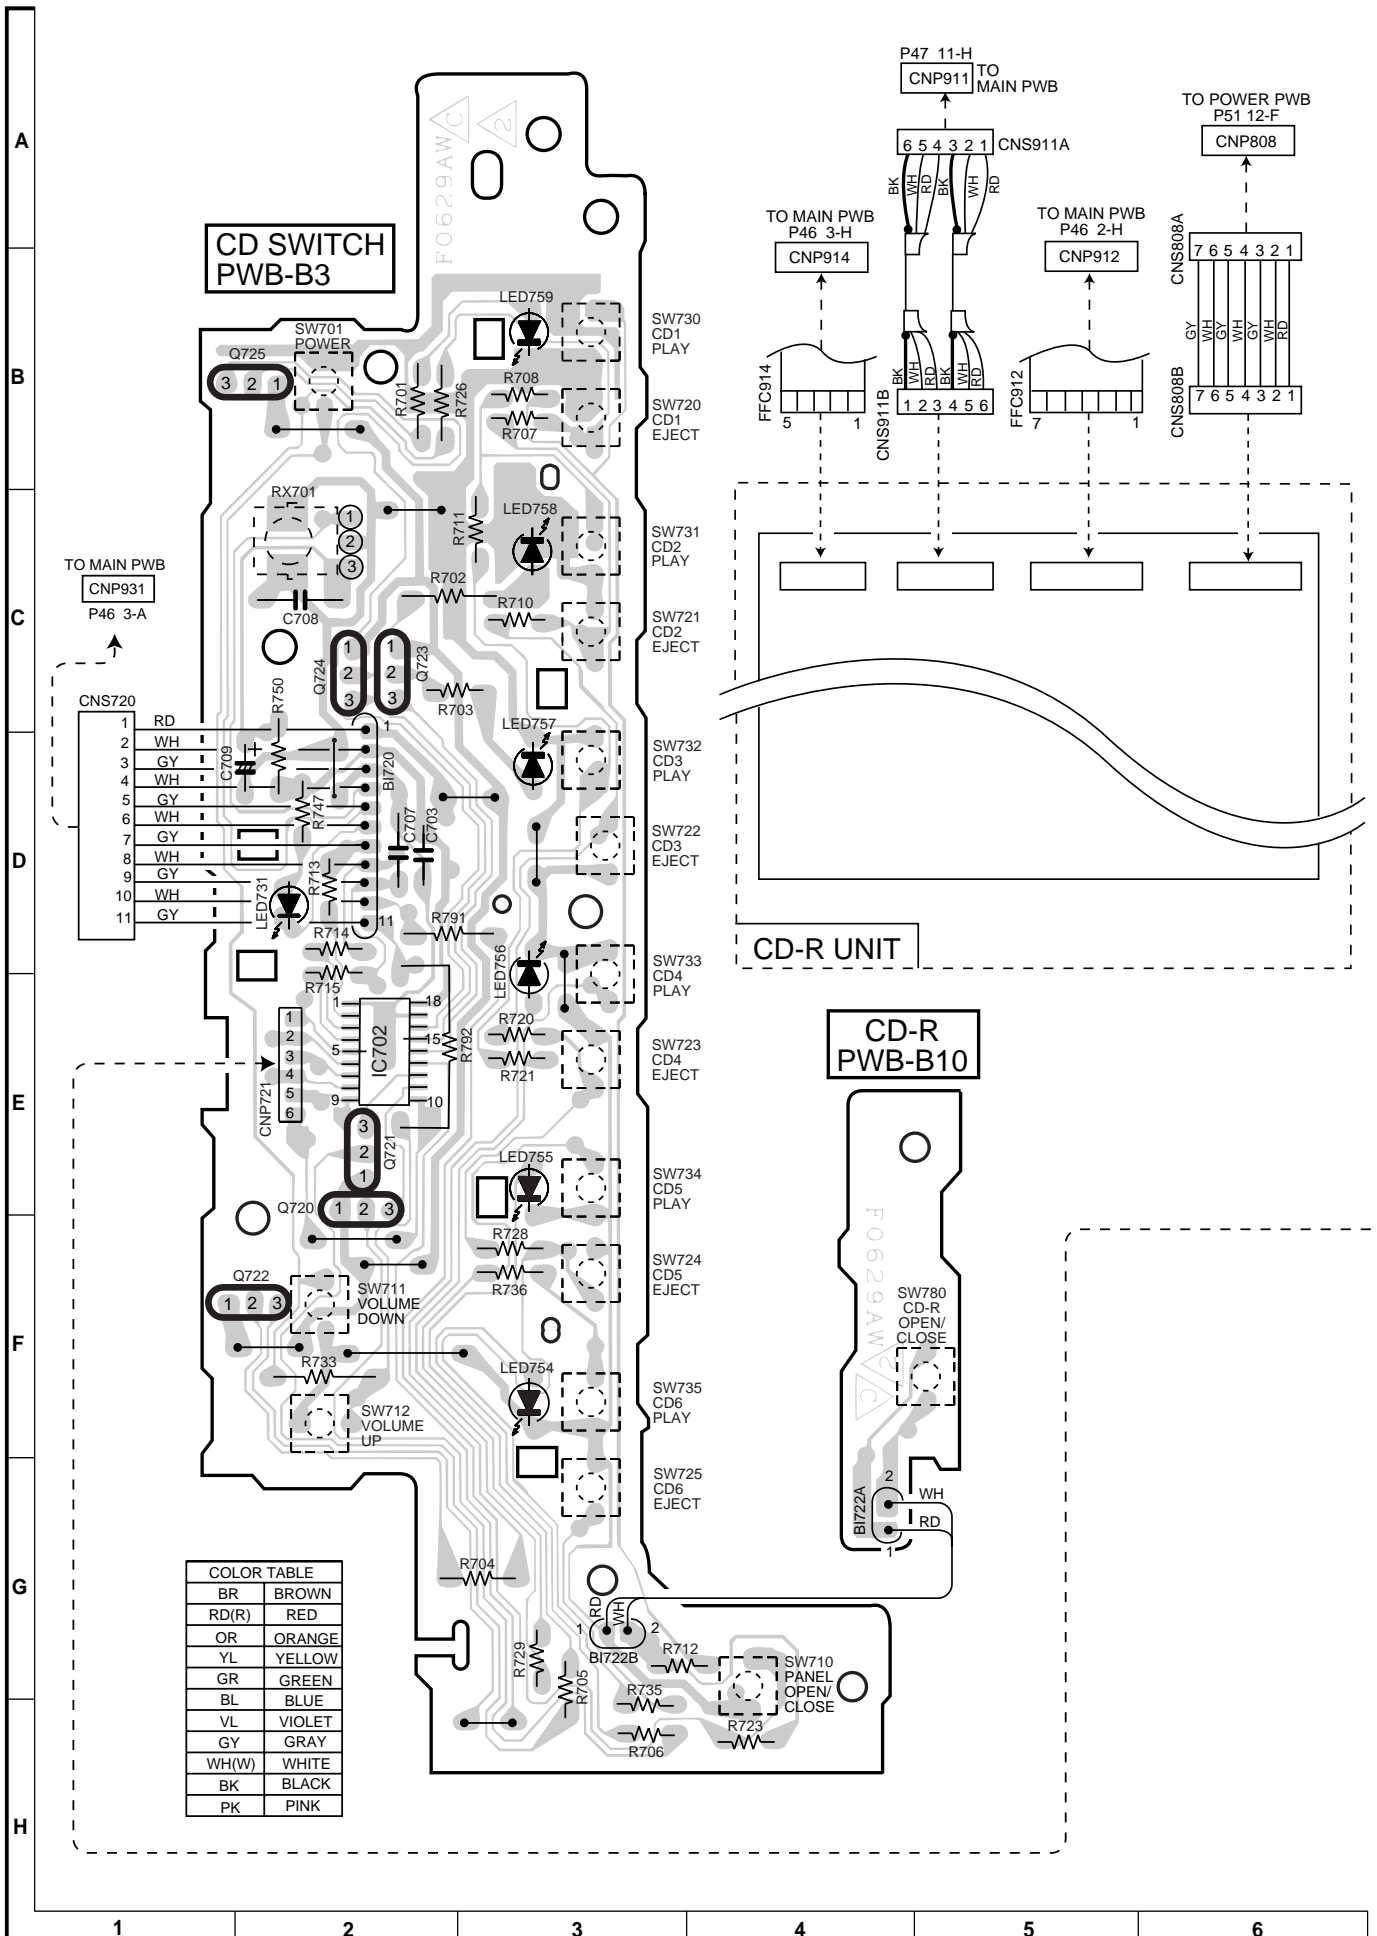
WIRING SIDE OF P.W.BOARD (2/9)
